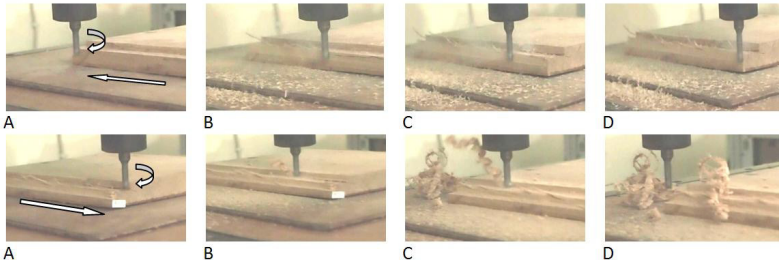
View on chips formation during up milling (conventional milling) and down milling (climb milling) using helical edge bit (15° helix angle) at beginning of cut (A), middle of cut (B and C), and end of cut (D).
